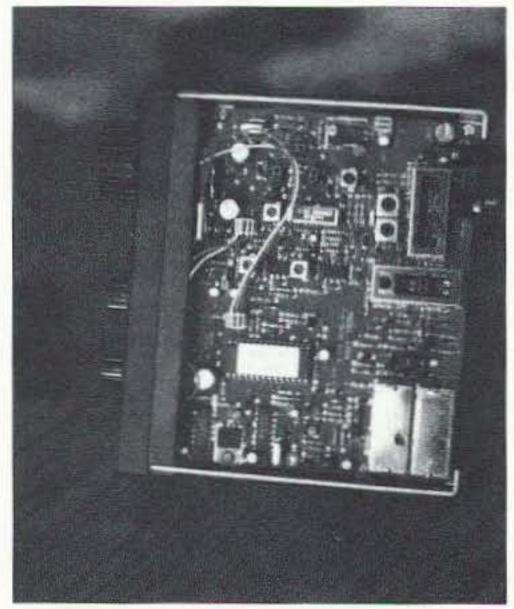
Photo A. Inside the Ten-Tec receiver, Notice the clean layout of the PC board. All major components mount on this one PC board. There is a smaller PC board that holds the display components.
